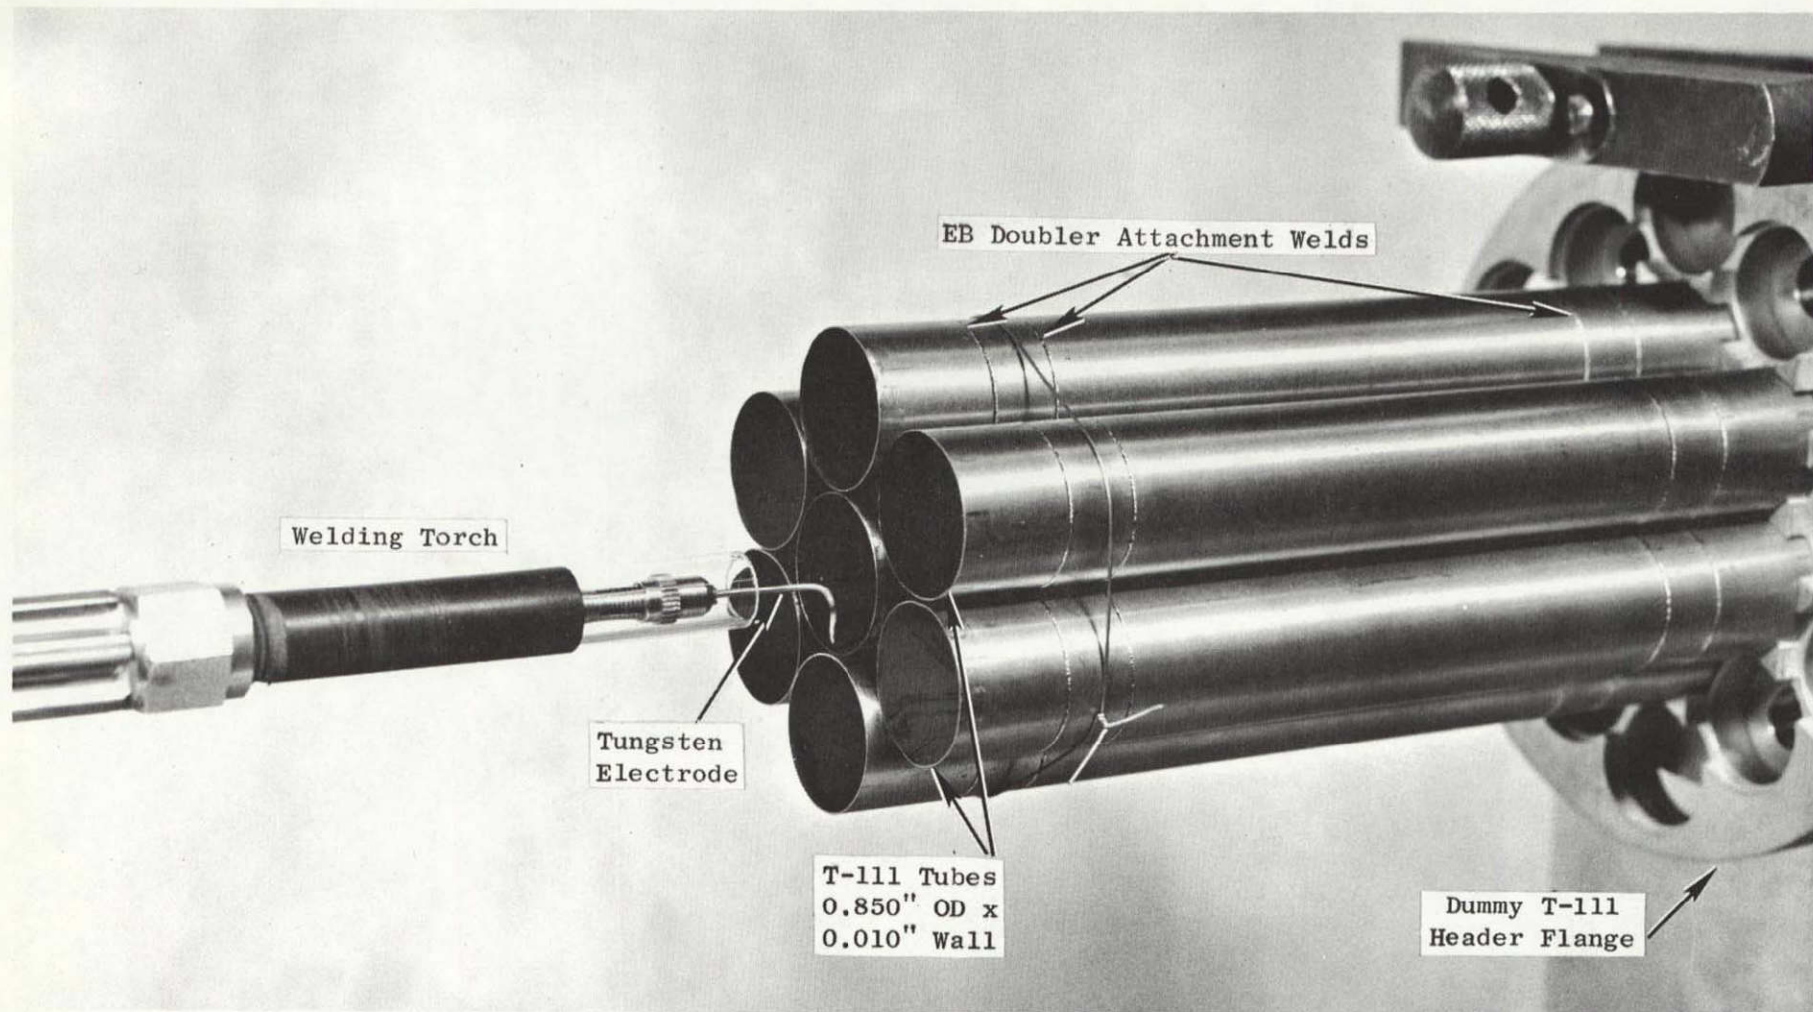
Closeup of Sample Tube Bundle and Special Welding Torch Ready for GTA Tube-to-Tube Welding. (70-6-13A)
